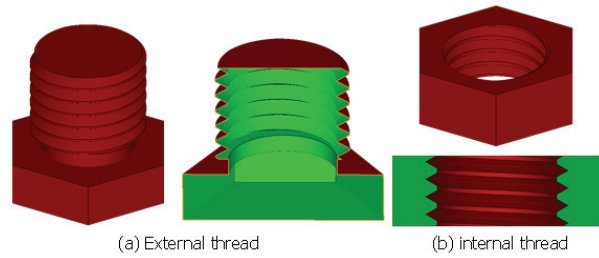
Simulated-aided design of ISO M24 screw thread.
